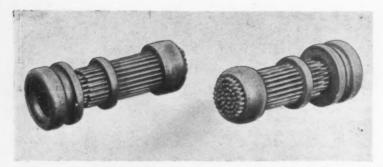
An Assembly Comprising Small-bore Stainless-steel Tubes, Copperbrazed to End and Intermediate Plates
